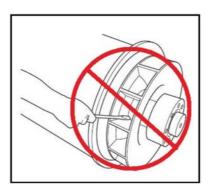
DO NOT ROTATE THE ALTERNATOR ROTOR WITH A LEVER
